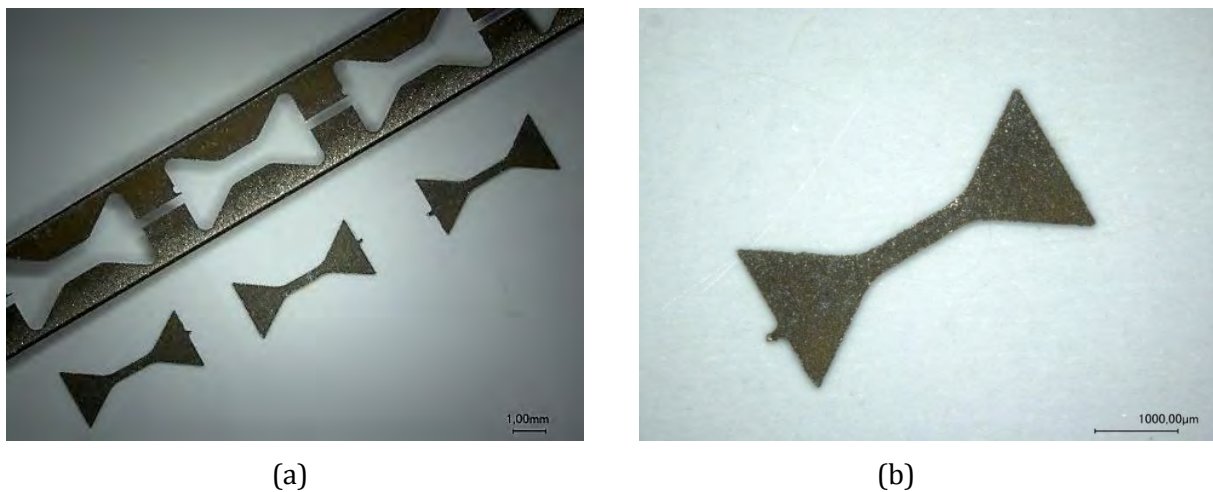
Dog bone shaped micro-specimens taken out via EDM from the grinded thin strip (a) and an enlarged view of the dog bone shaped micro-specimen (b).
